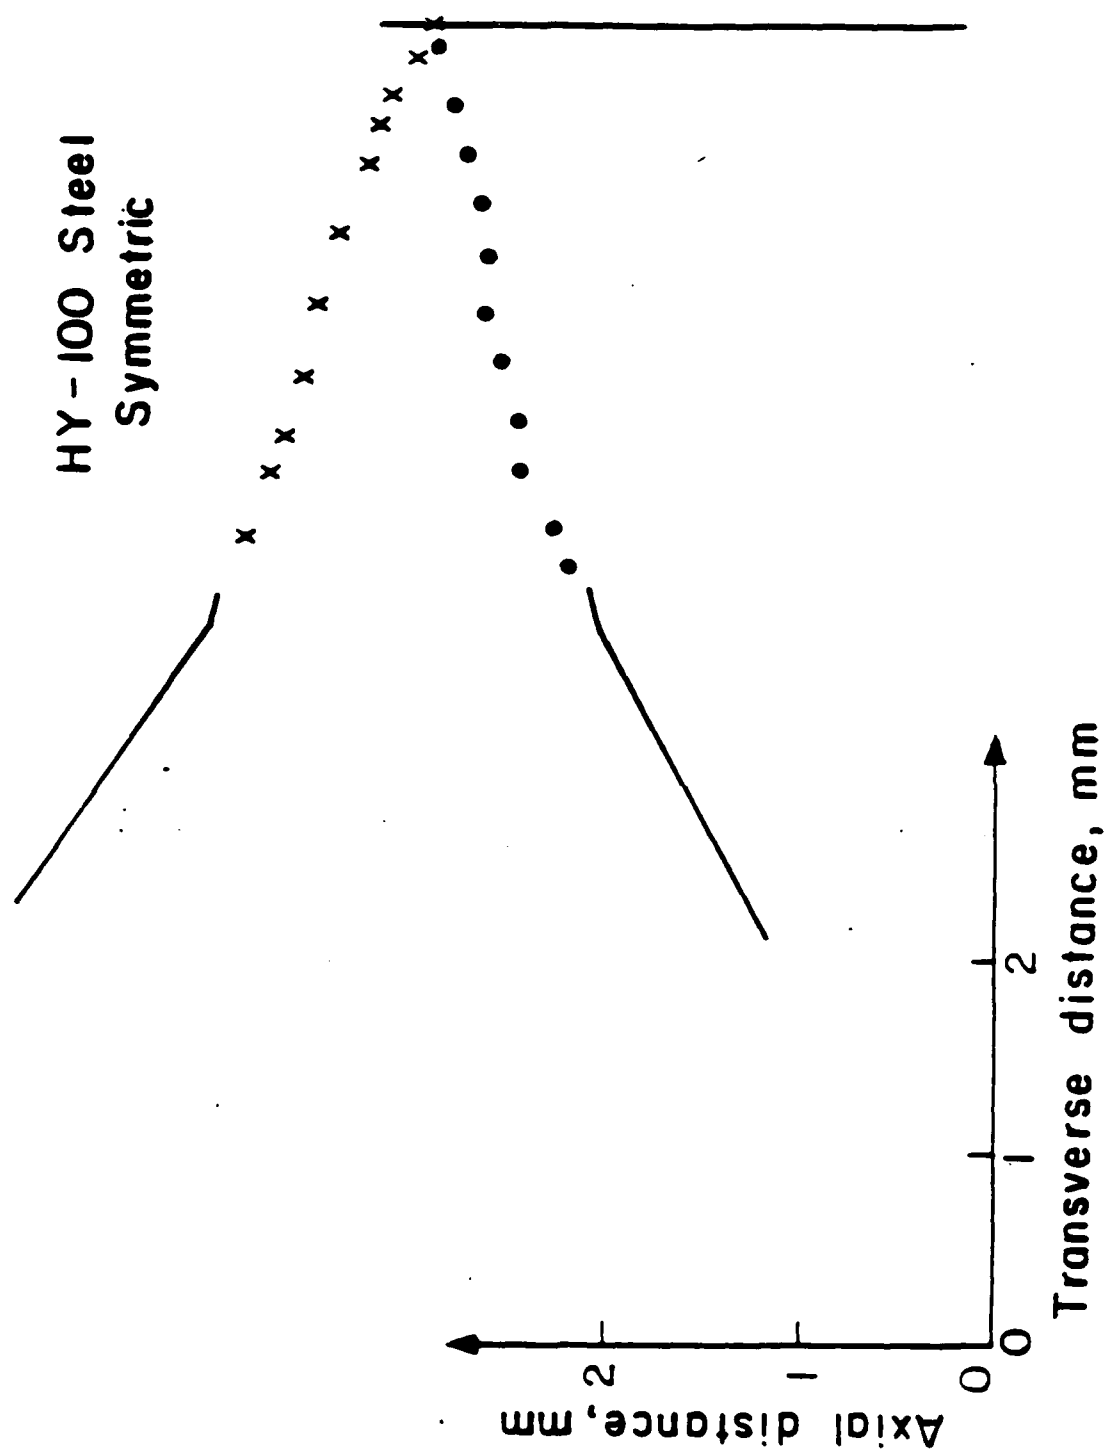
Fracture Surface Profile for the HY-100 Steel
